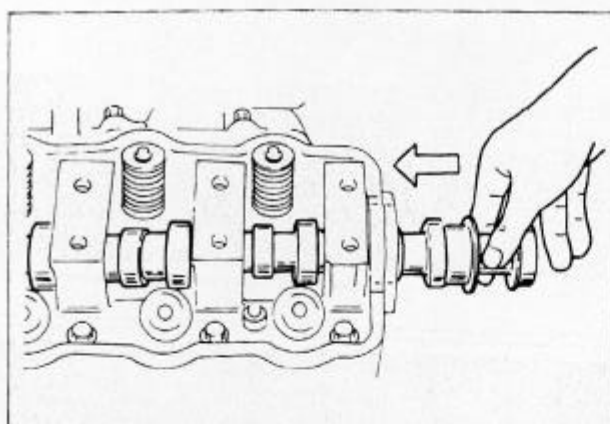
A - 71 INSTALLATION OF CAMSHAFT
